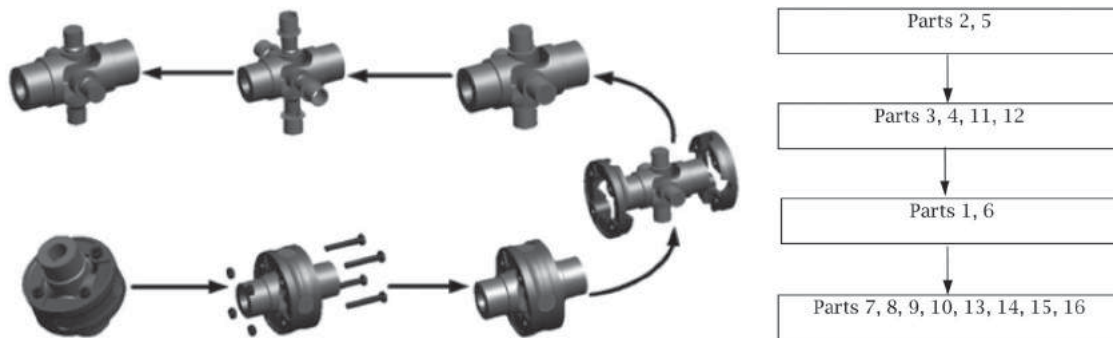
The diaassembly result of a cross coupling. (a)The complete disassembly of a cross coupling, (b) The layers of ASP.
